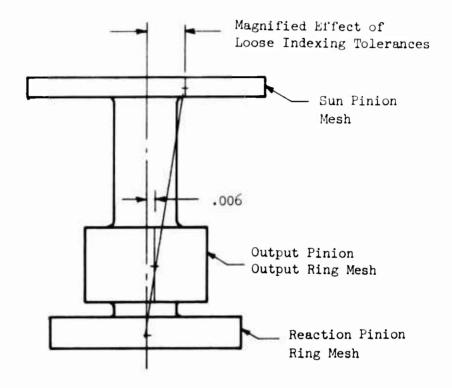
Pinion Shaft with Magnified Indexing Tolerances
